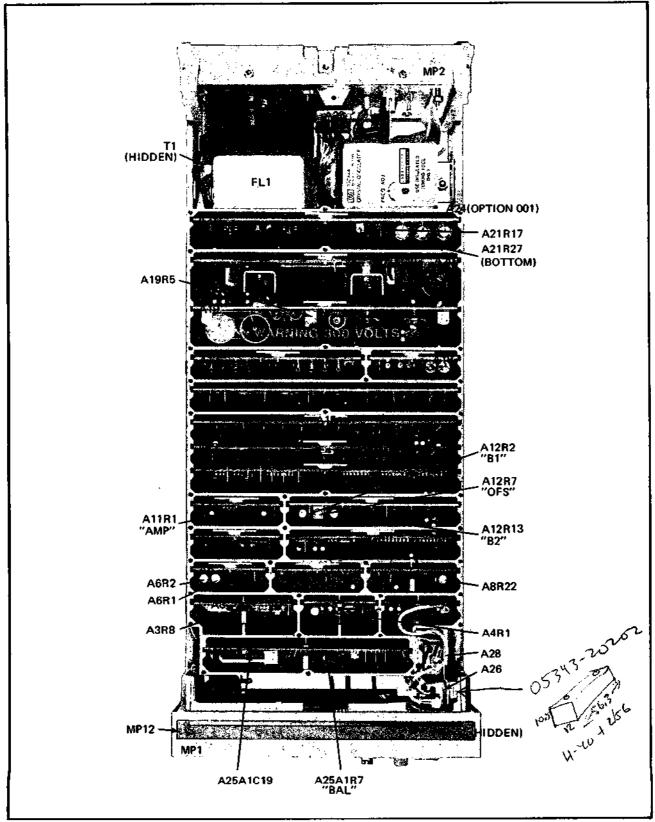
5343A Top View (Assembly Location and Adjustments)
